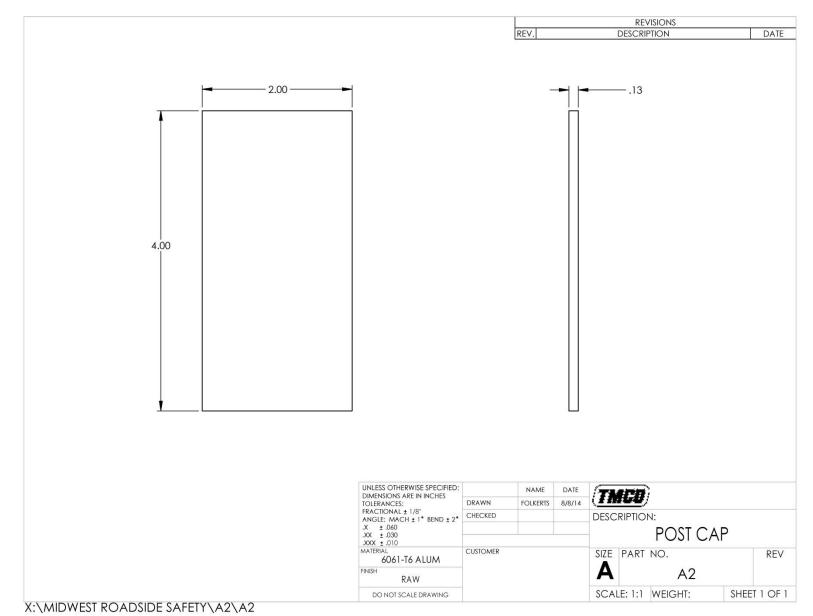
Fabrication Drawings, Test Nos. APR-1 and APR-2
